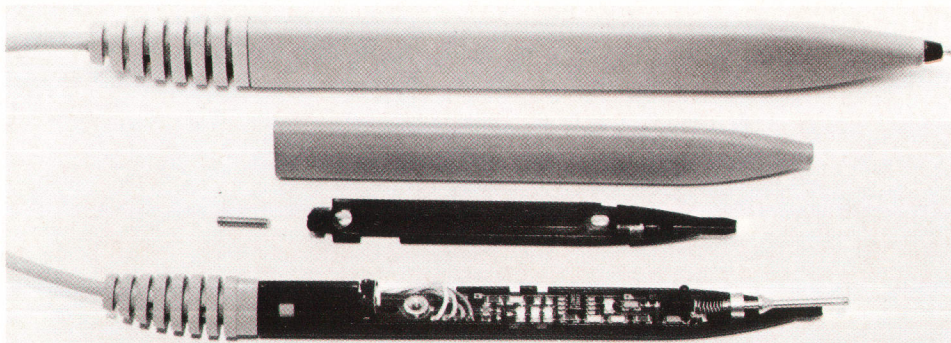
Assembled (top) and disassembled (bottom) stylus assembly showing amplifier board using surface mount components.
